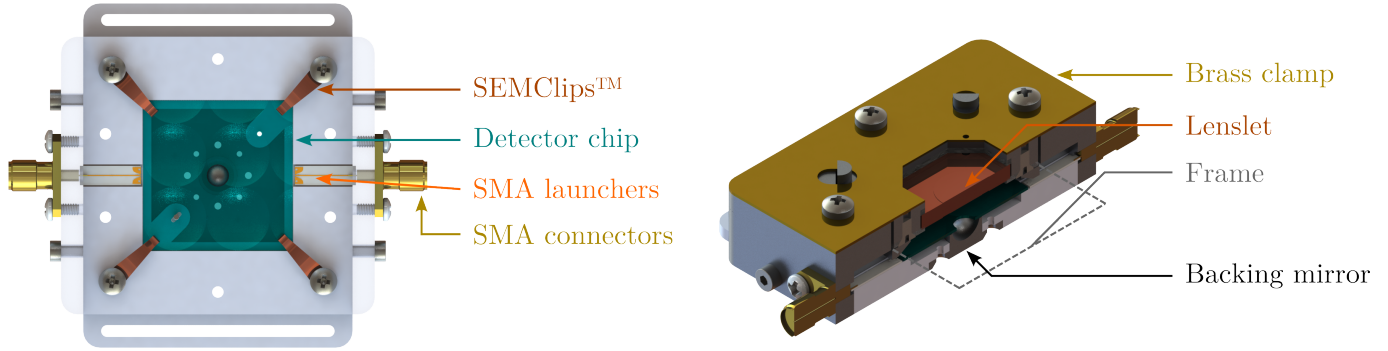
CAD model of the detector chip holder, with depicted constituents. Figure made with Solidworks and Inkscape by the author.
